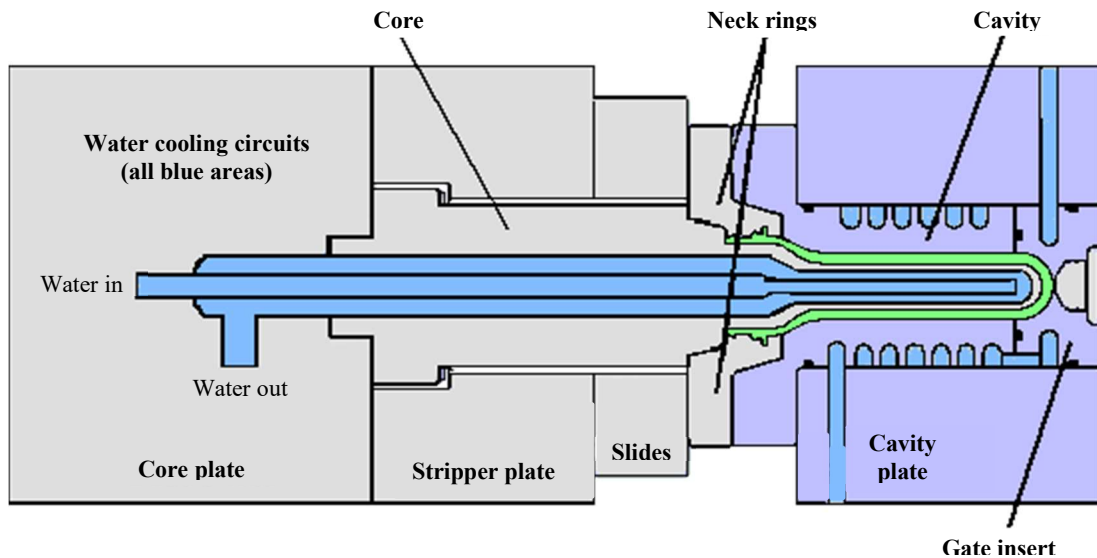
Typical components of a preform injection mold. Adapted from [83]
